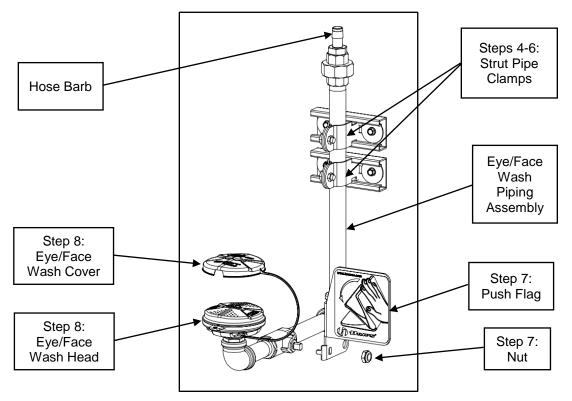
Eye/Face Wash Assembly (Frame Hidden for Clarity)
